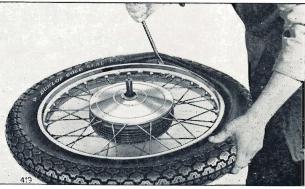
Refitting the second bead over the wheel rim. Care must be taken not to trap inner tube
